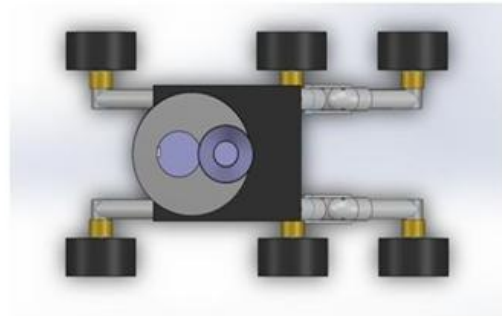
Solidworks Top View 3d Models Of Rocker Bogie System
